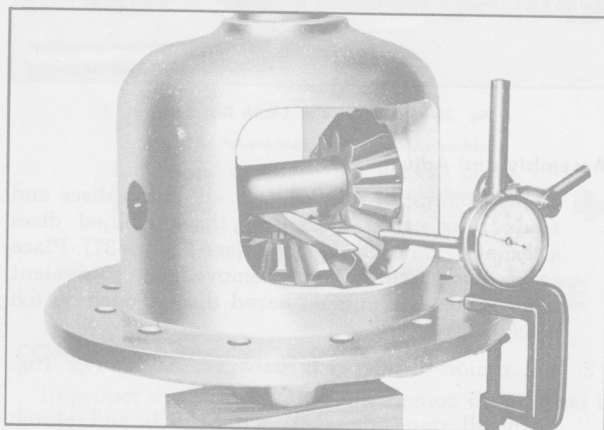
Gauging Pinion-to-Side Gear Backlash
